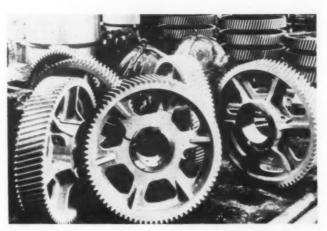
Ductile iron paper mill gears, still good after 2 years where cast iron wore out in 6 months.
